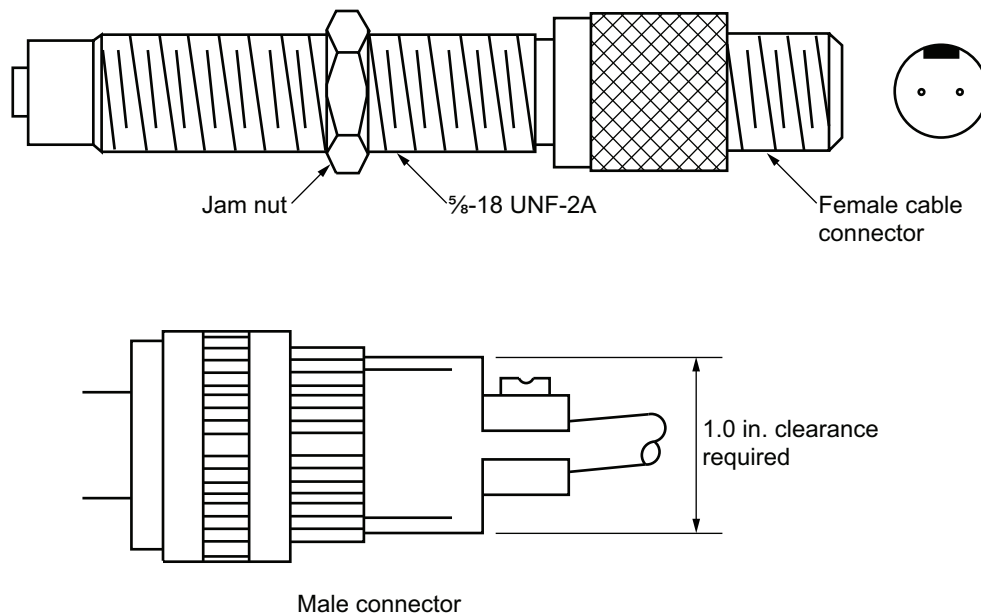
Standard Magnetic Speed Sensor with Removable (Nonintegral) Cable and Connector
